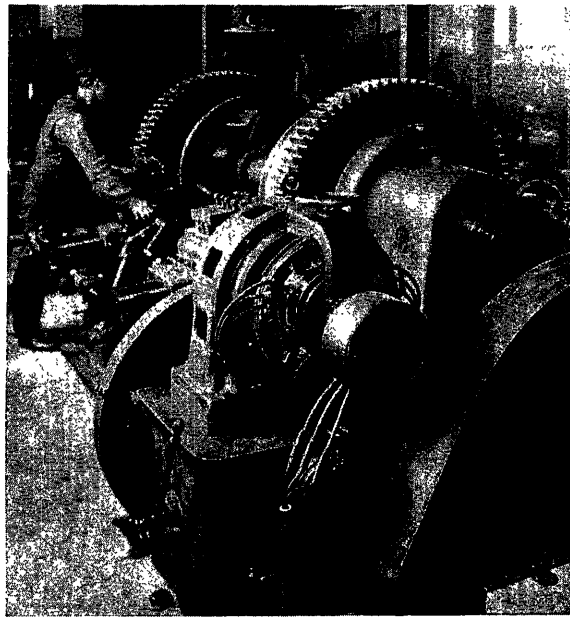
Three-phase Commutator Motor 24/8 h. p., driving a wheel-lathe.
